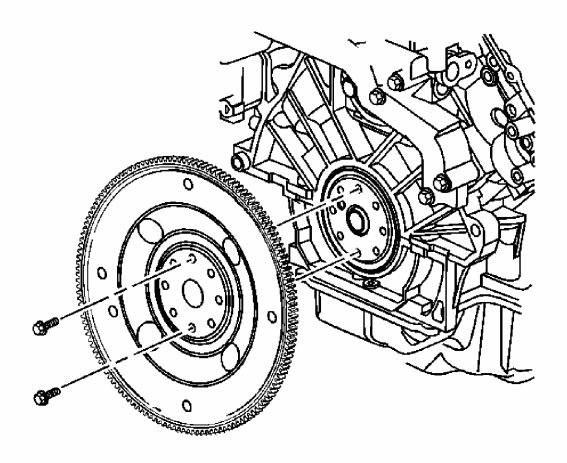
Identifying 8 Engine Flywheel Mounting Bolts Courtesy of GENERAL MOTORS CORP.
